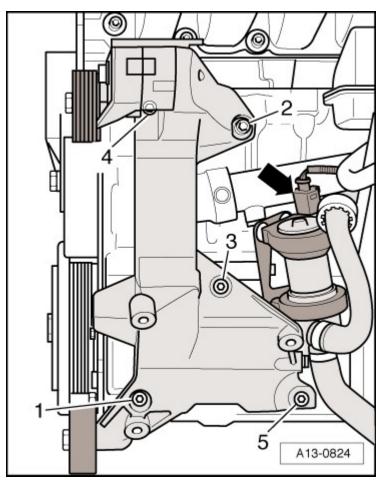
Accessory Assembly Bracket Bolts & After-Run Coolant Pump V51 Electrical Harness Connector
